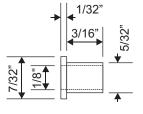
Lower Spindle Bearing Bush 2x, Brass
